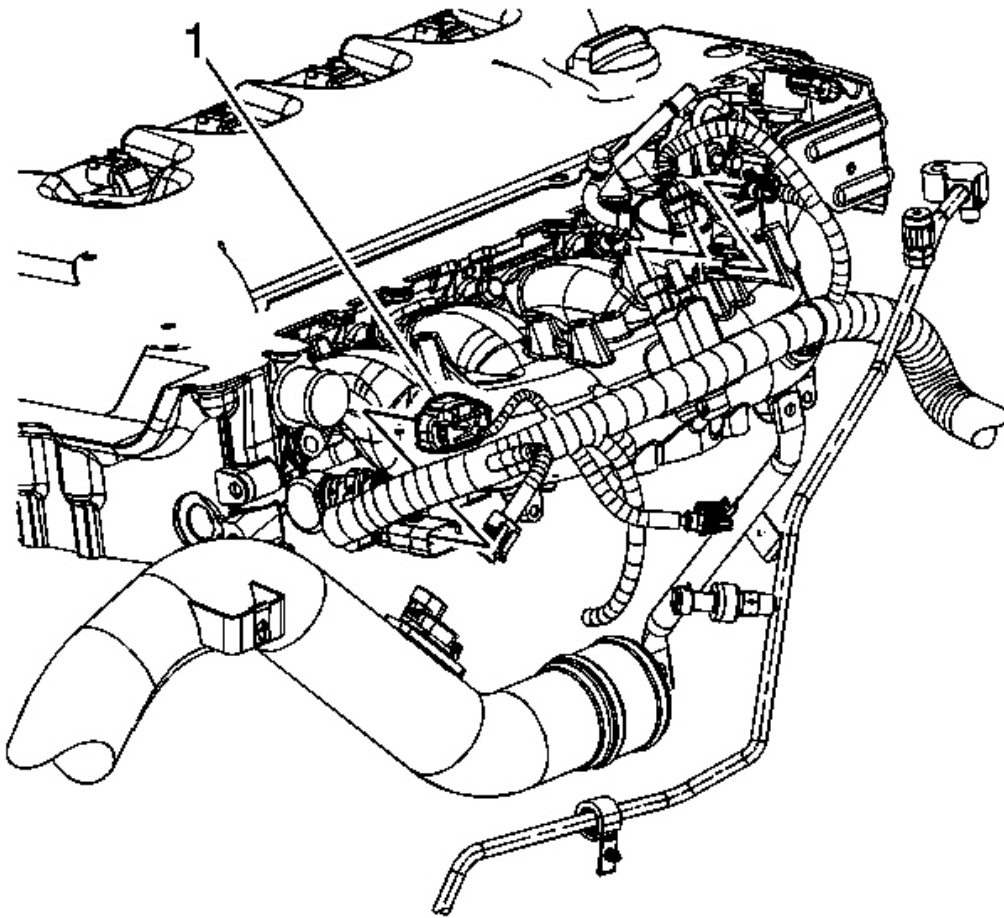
Identifying Engine Wiring Harness Connector & Fuel Injector Wiring Harness Connector
